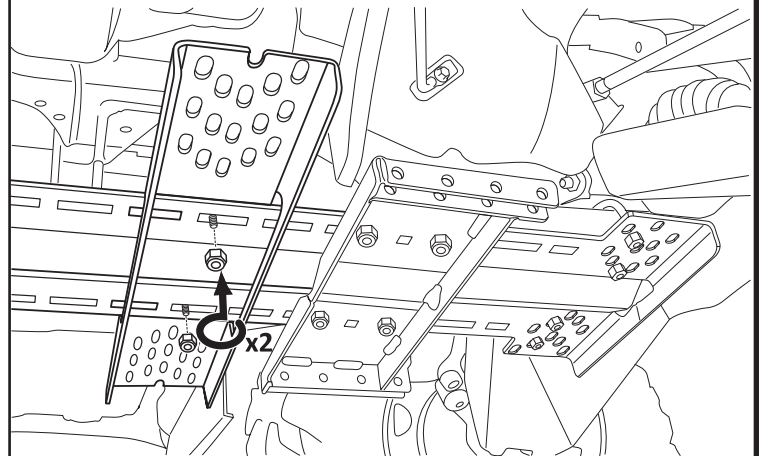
Loosely secure rear contact plate to spine with carriage bolts.
